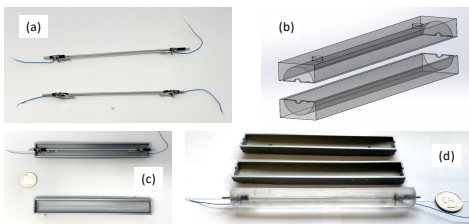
Fabrication process of a prototype smart needle using polymer infusion.
